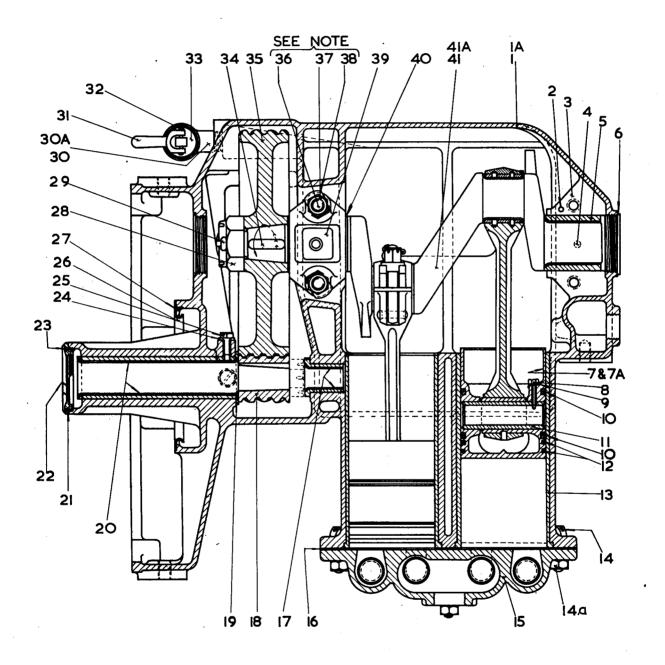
COMPRESSOR - SECTIONAL VIEW.
